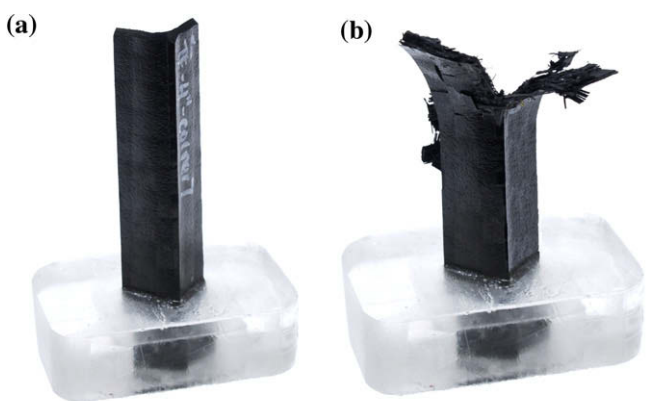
(a, b) Small corner element, specimen IV, before and after crush testing.
